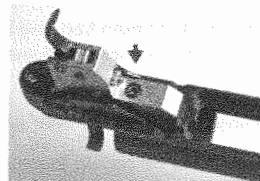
, Allen head mounting screw of three position safety, trigger assembly
